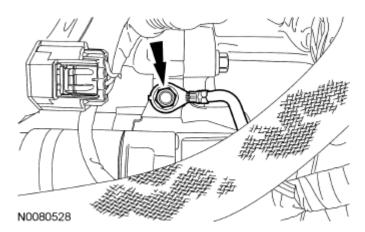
Locating Starter Motor Isolator Courtesy of FORD MOTOR CO.
